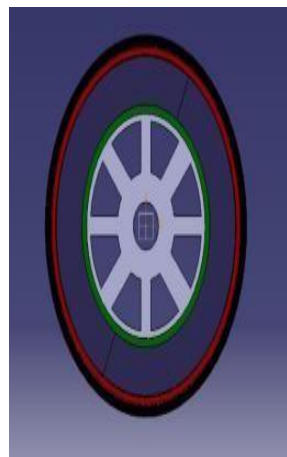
THE ASSEMBLY OF PIEZO SENSOR MODULE INSIDE THE TYRE USING CAD.
